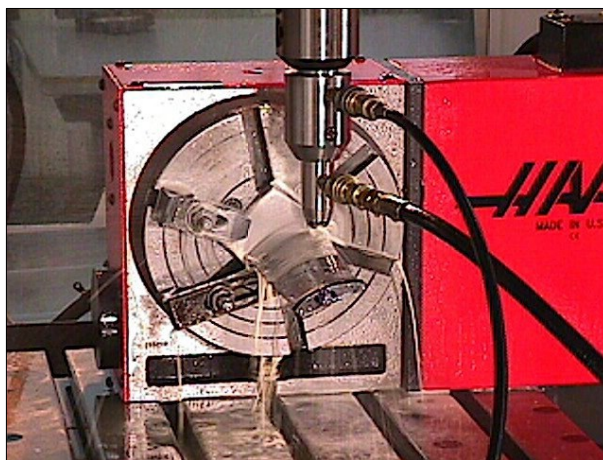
LPB application to an engine compressor blade using four-axis CNC milling machine [59].
